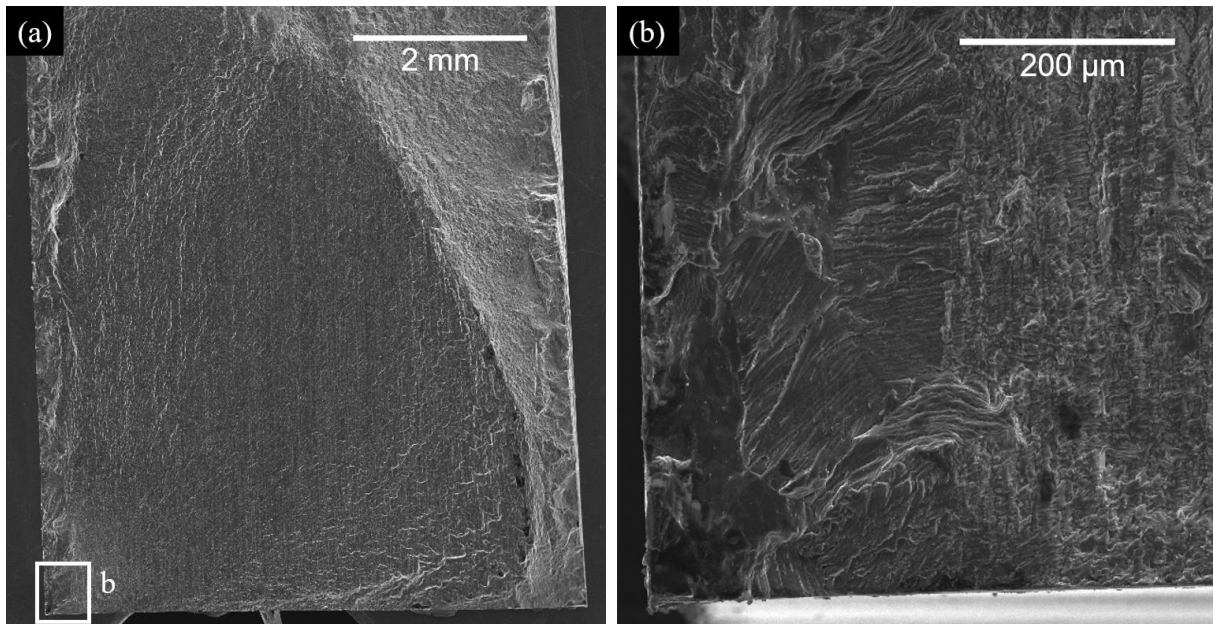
Fracture surface of uncorroded as extruded specimen.
